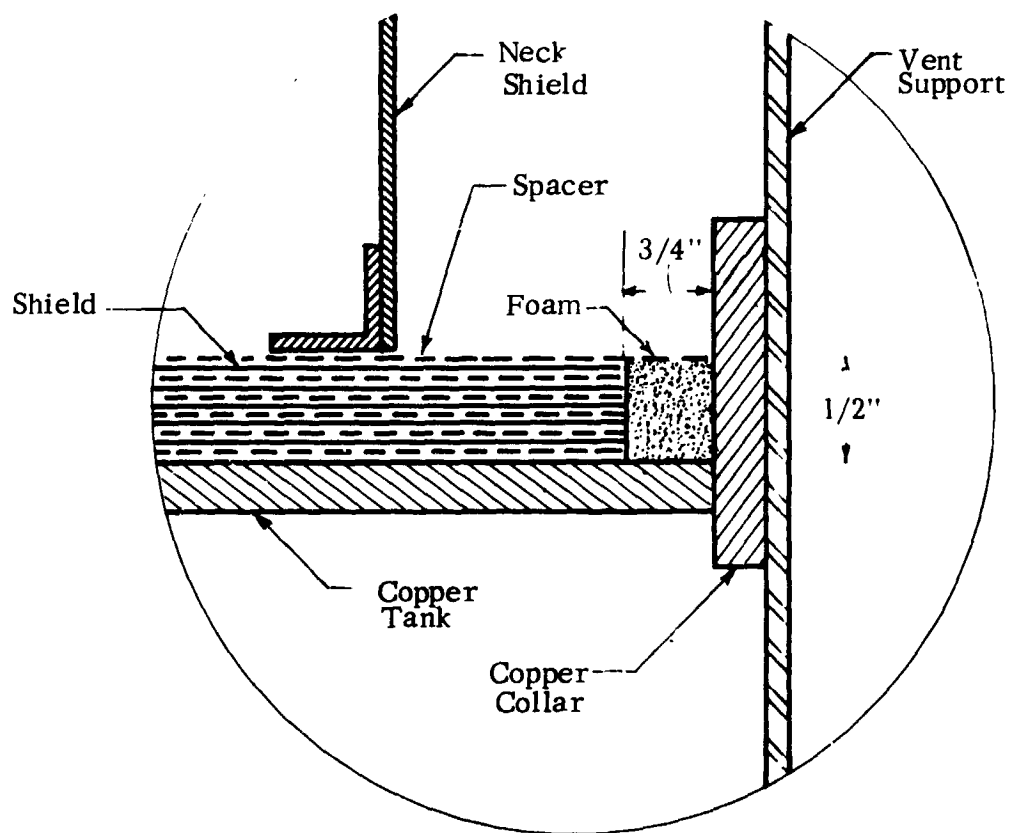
INSULATION SYSTEM NO. 11, NECK DETAIL
